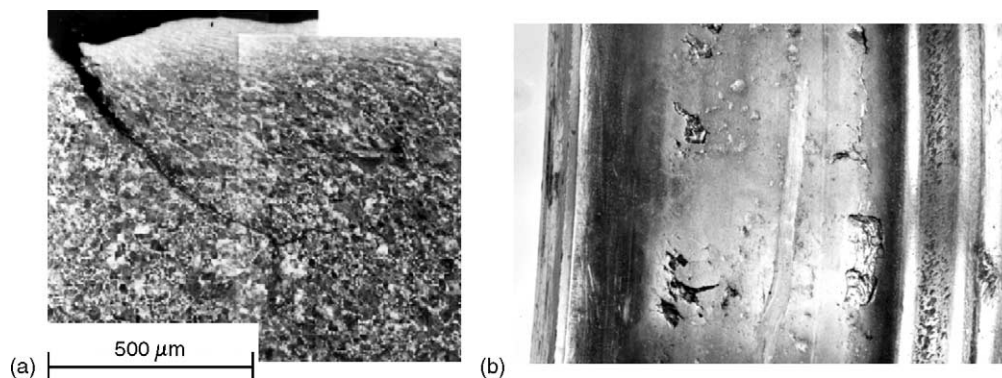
(a) Deformed microstructure and crack growth in rolling contact. (b) Surface damage due to surface initiated fatigue (from [3]).
